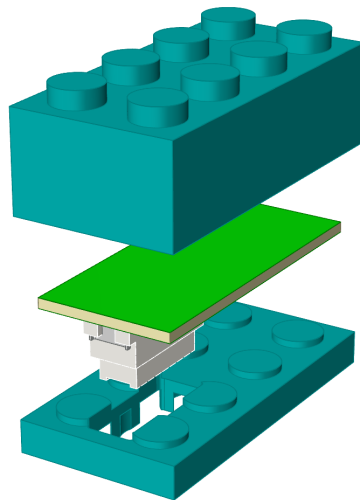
Exploded view of an extension module: PCB (middle) between the enclosure top part and bottom plate.
